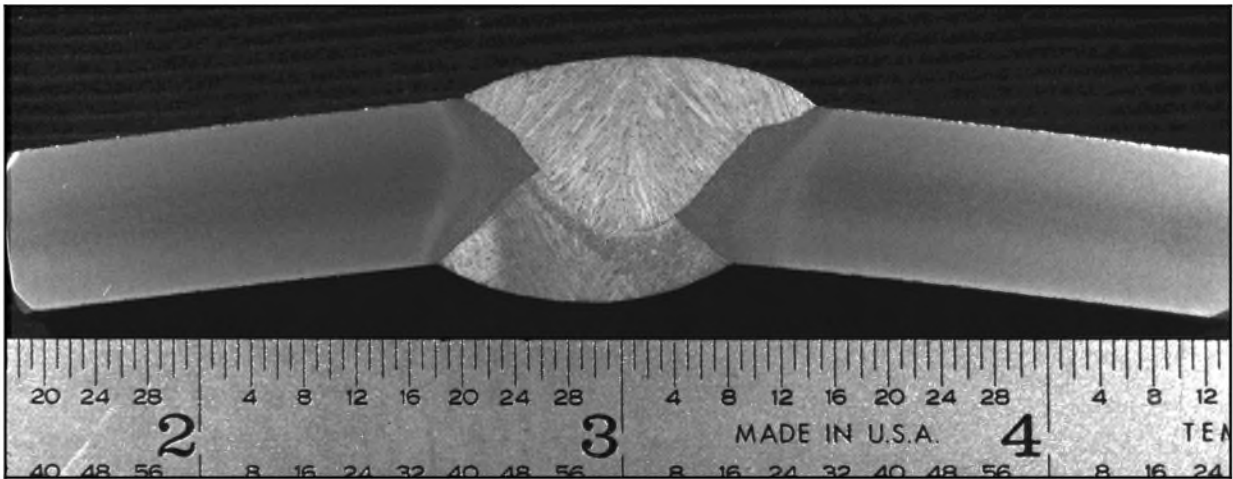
Metallographically prepared transverse seam weld macro removed from the failed joint upstream of the rupture.
